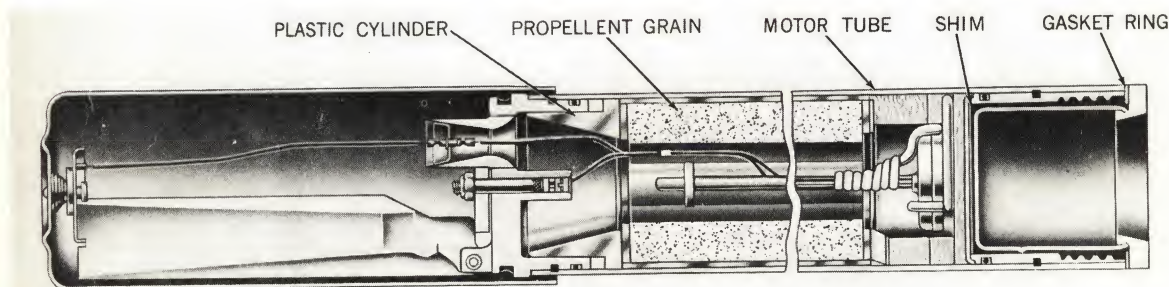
2.75-Inch Rocket Motor Mk 3 Mod 3, Sectional View.
